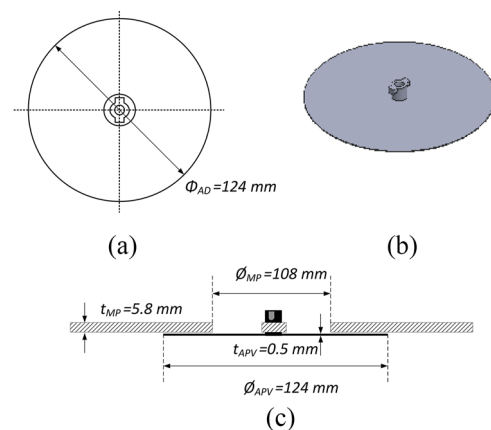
Nominal geometric parameters of the acoustic plate-valve. (a) Plan view. (b) CAD design. (c) Elevation view.
